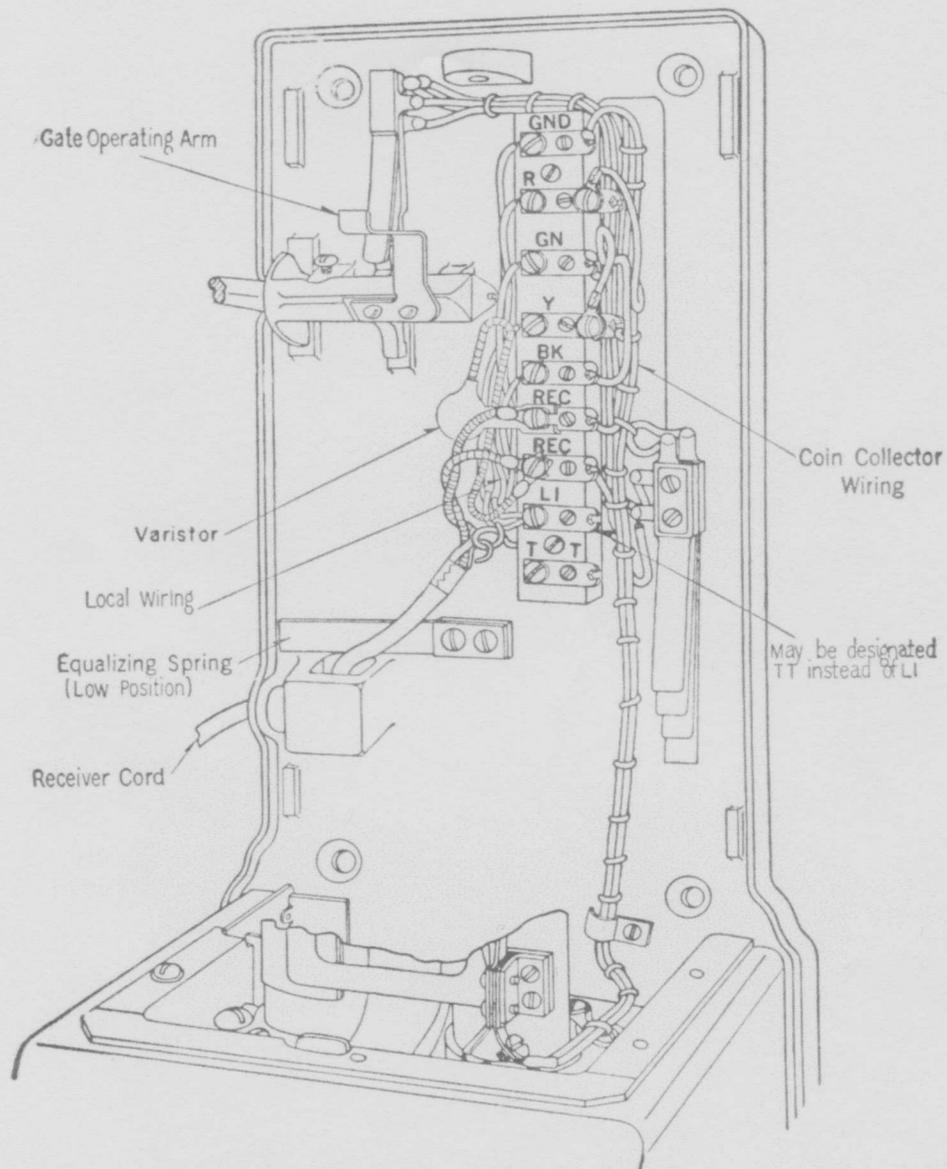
155-type Coin Collector with Equalizing Spring in Low Position—Lower Housing and Backplate Assembly
